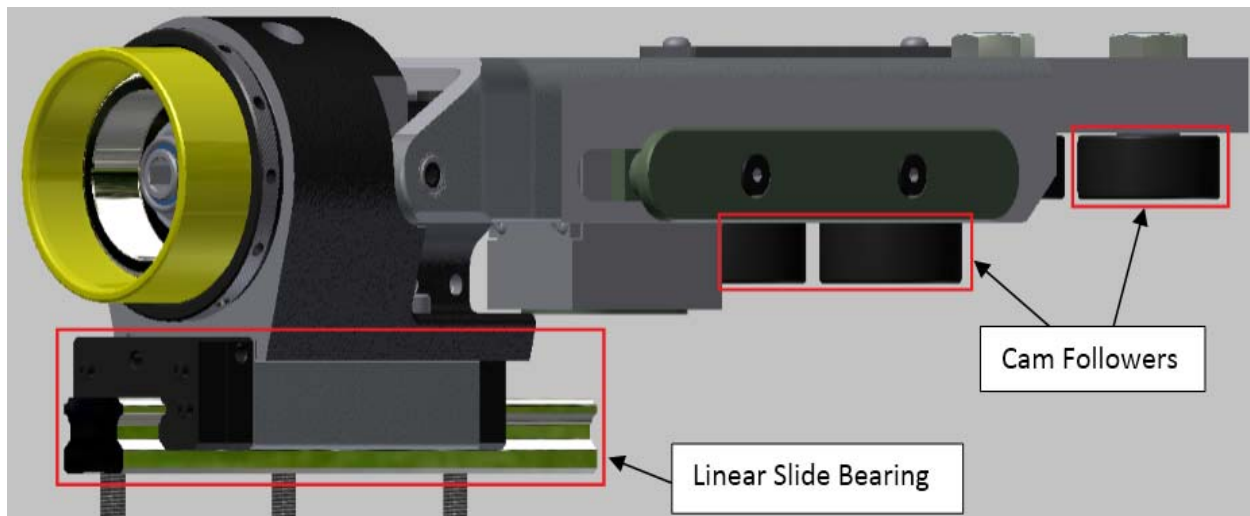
Linear Slide Bearing and Cam Followers as seen on a standard Necker Ram. Linear Slide Bearings and Cam Followers are also used on Flanger and Reformer Push Ram assemblies.
